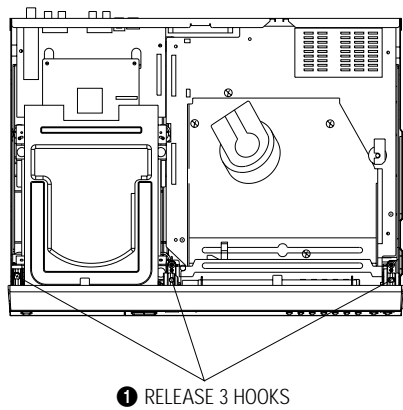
Ass'y Front Panel Removal(Top View)
